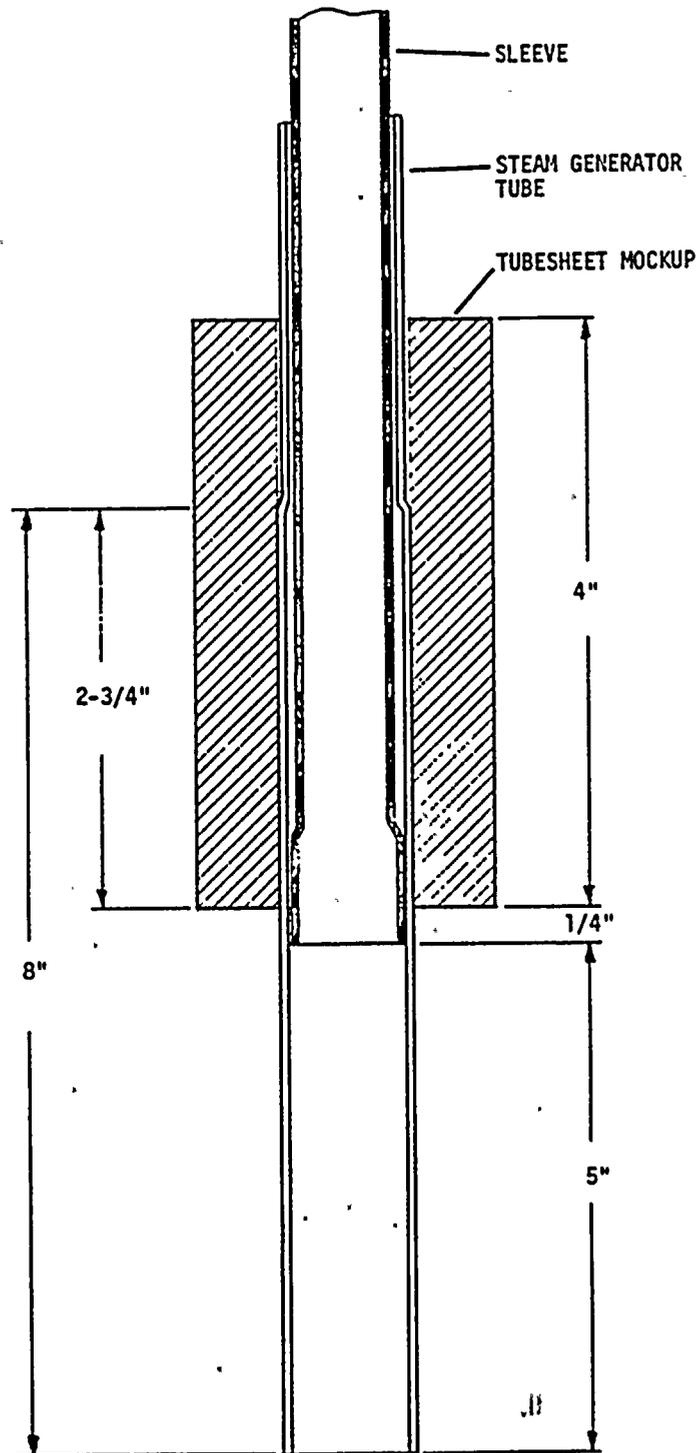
Detail of Lower Sleeve-to-Tube Joint Region of Design Verification Test Specimen (Before Explosive Weld)
